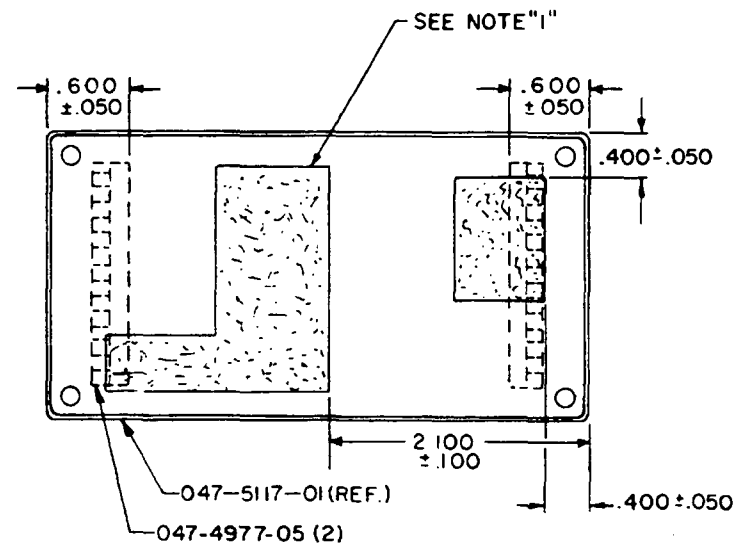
KR 87 POWER SUPPLY BOARD ASSEMBLY
